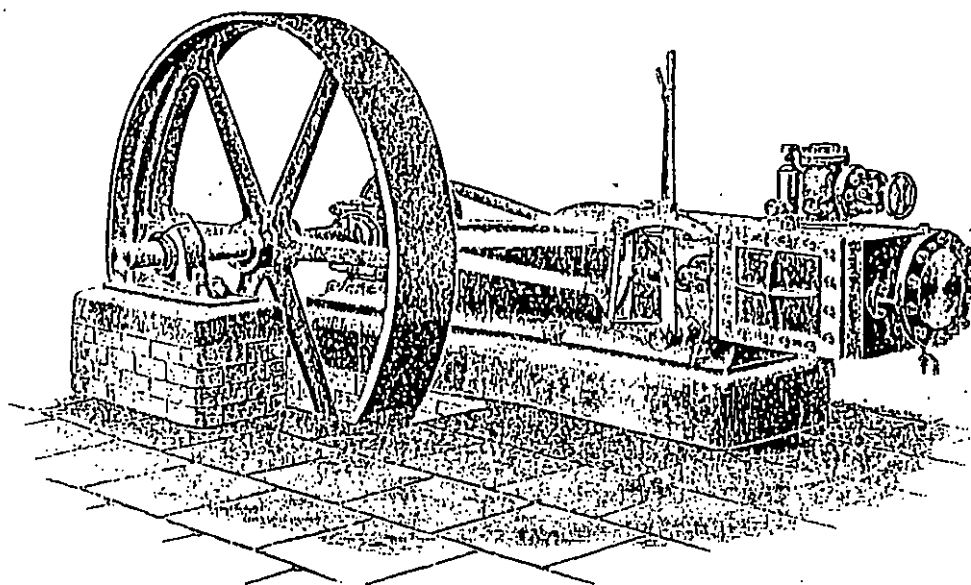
PLATE XVI: A Fawcett steam driven screw press, c 1850.
